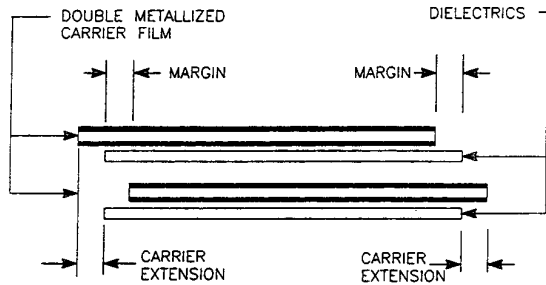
CARRIER (1 SECTION) WINDING CONSTRUCTION
